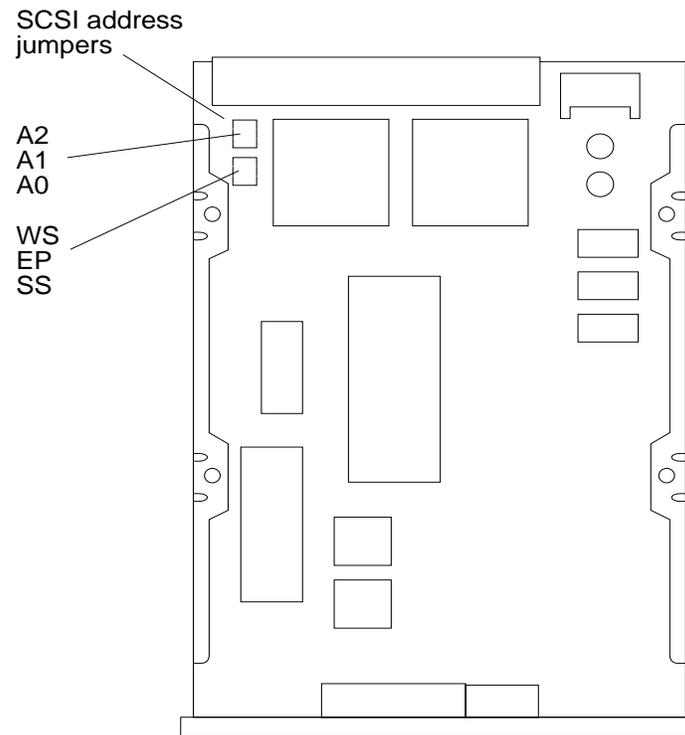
Hard Disk Drive Controller Board With the Bracket Removed
